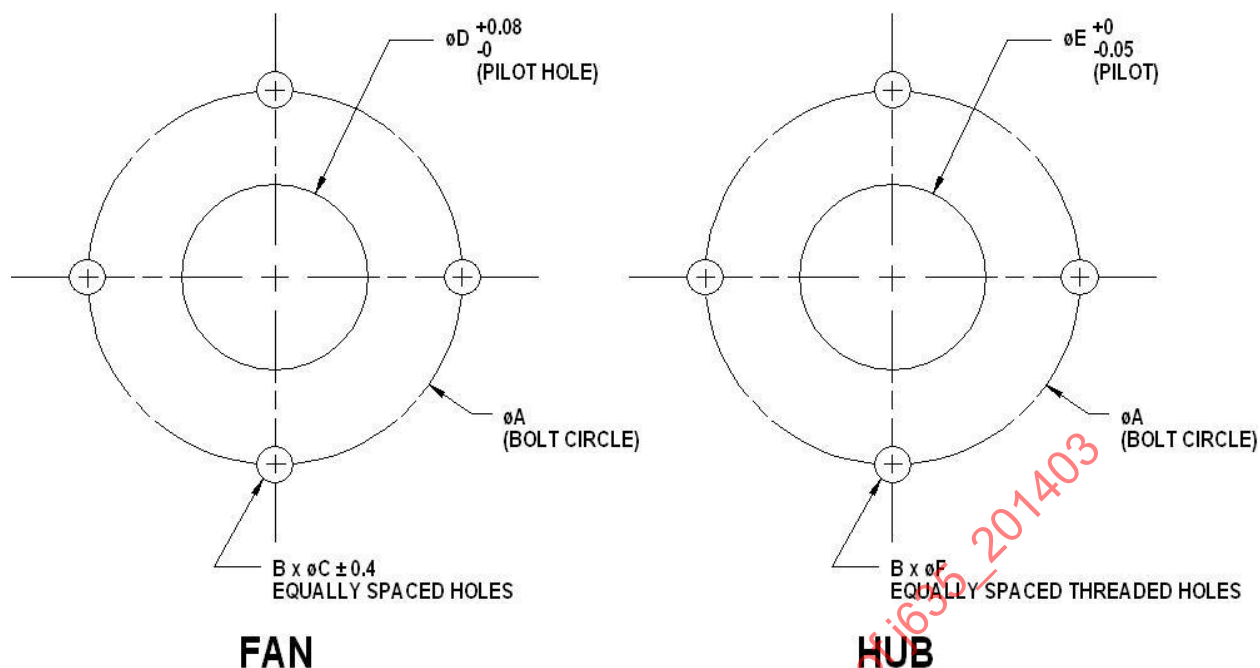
FIXED DRIVE MOUNTING PATTERNS
